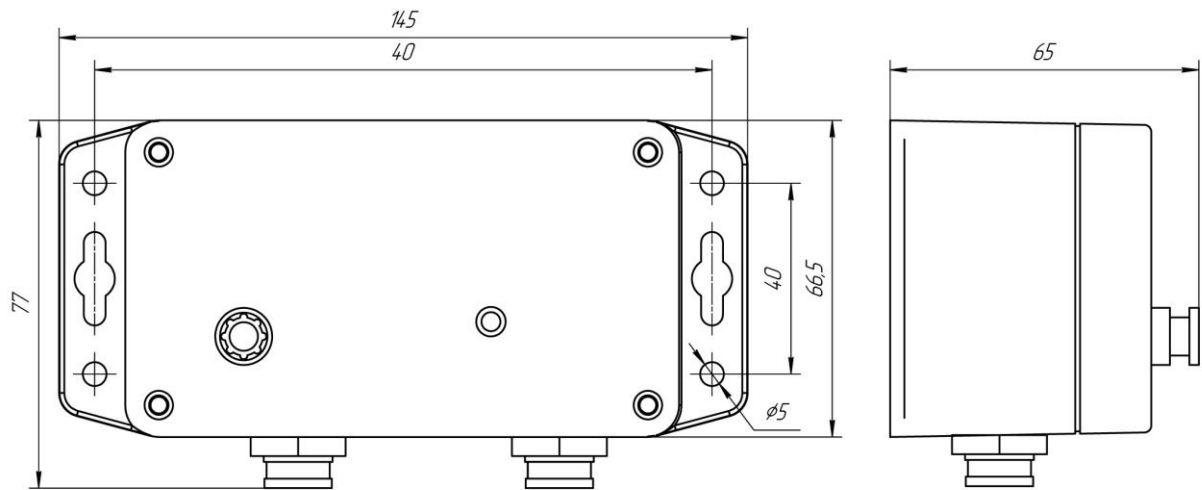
Overall and mounting dimensions of Power Adapter
